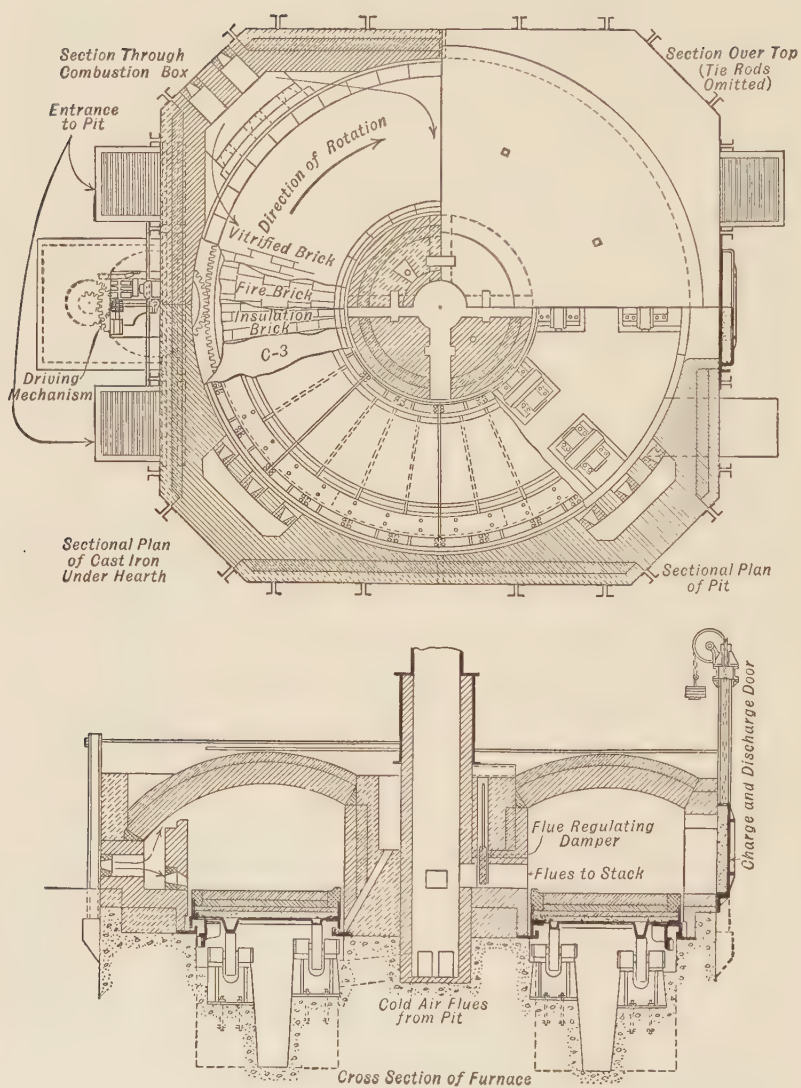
Large furnace with rotating hearth for hardening gears in containers.
